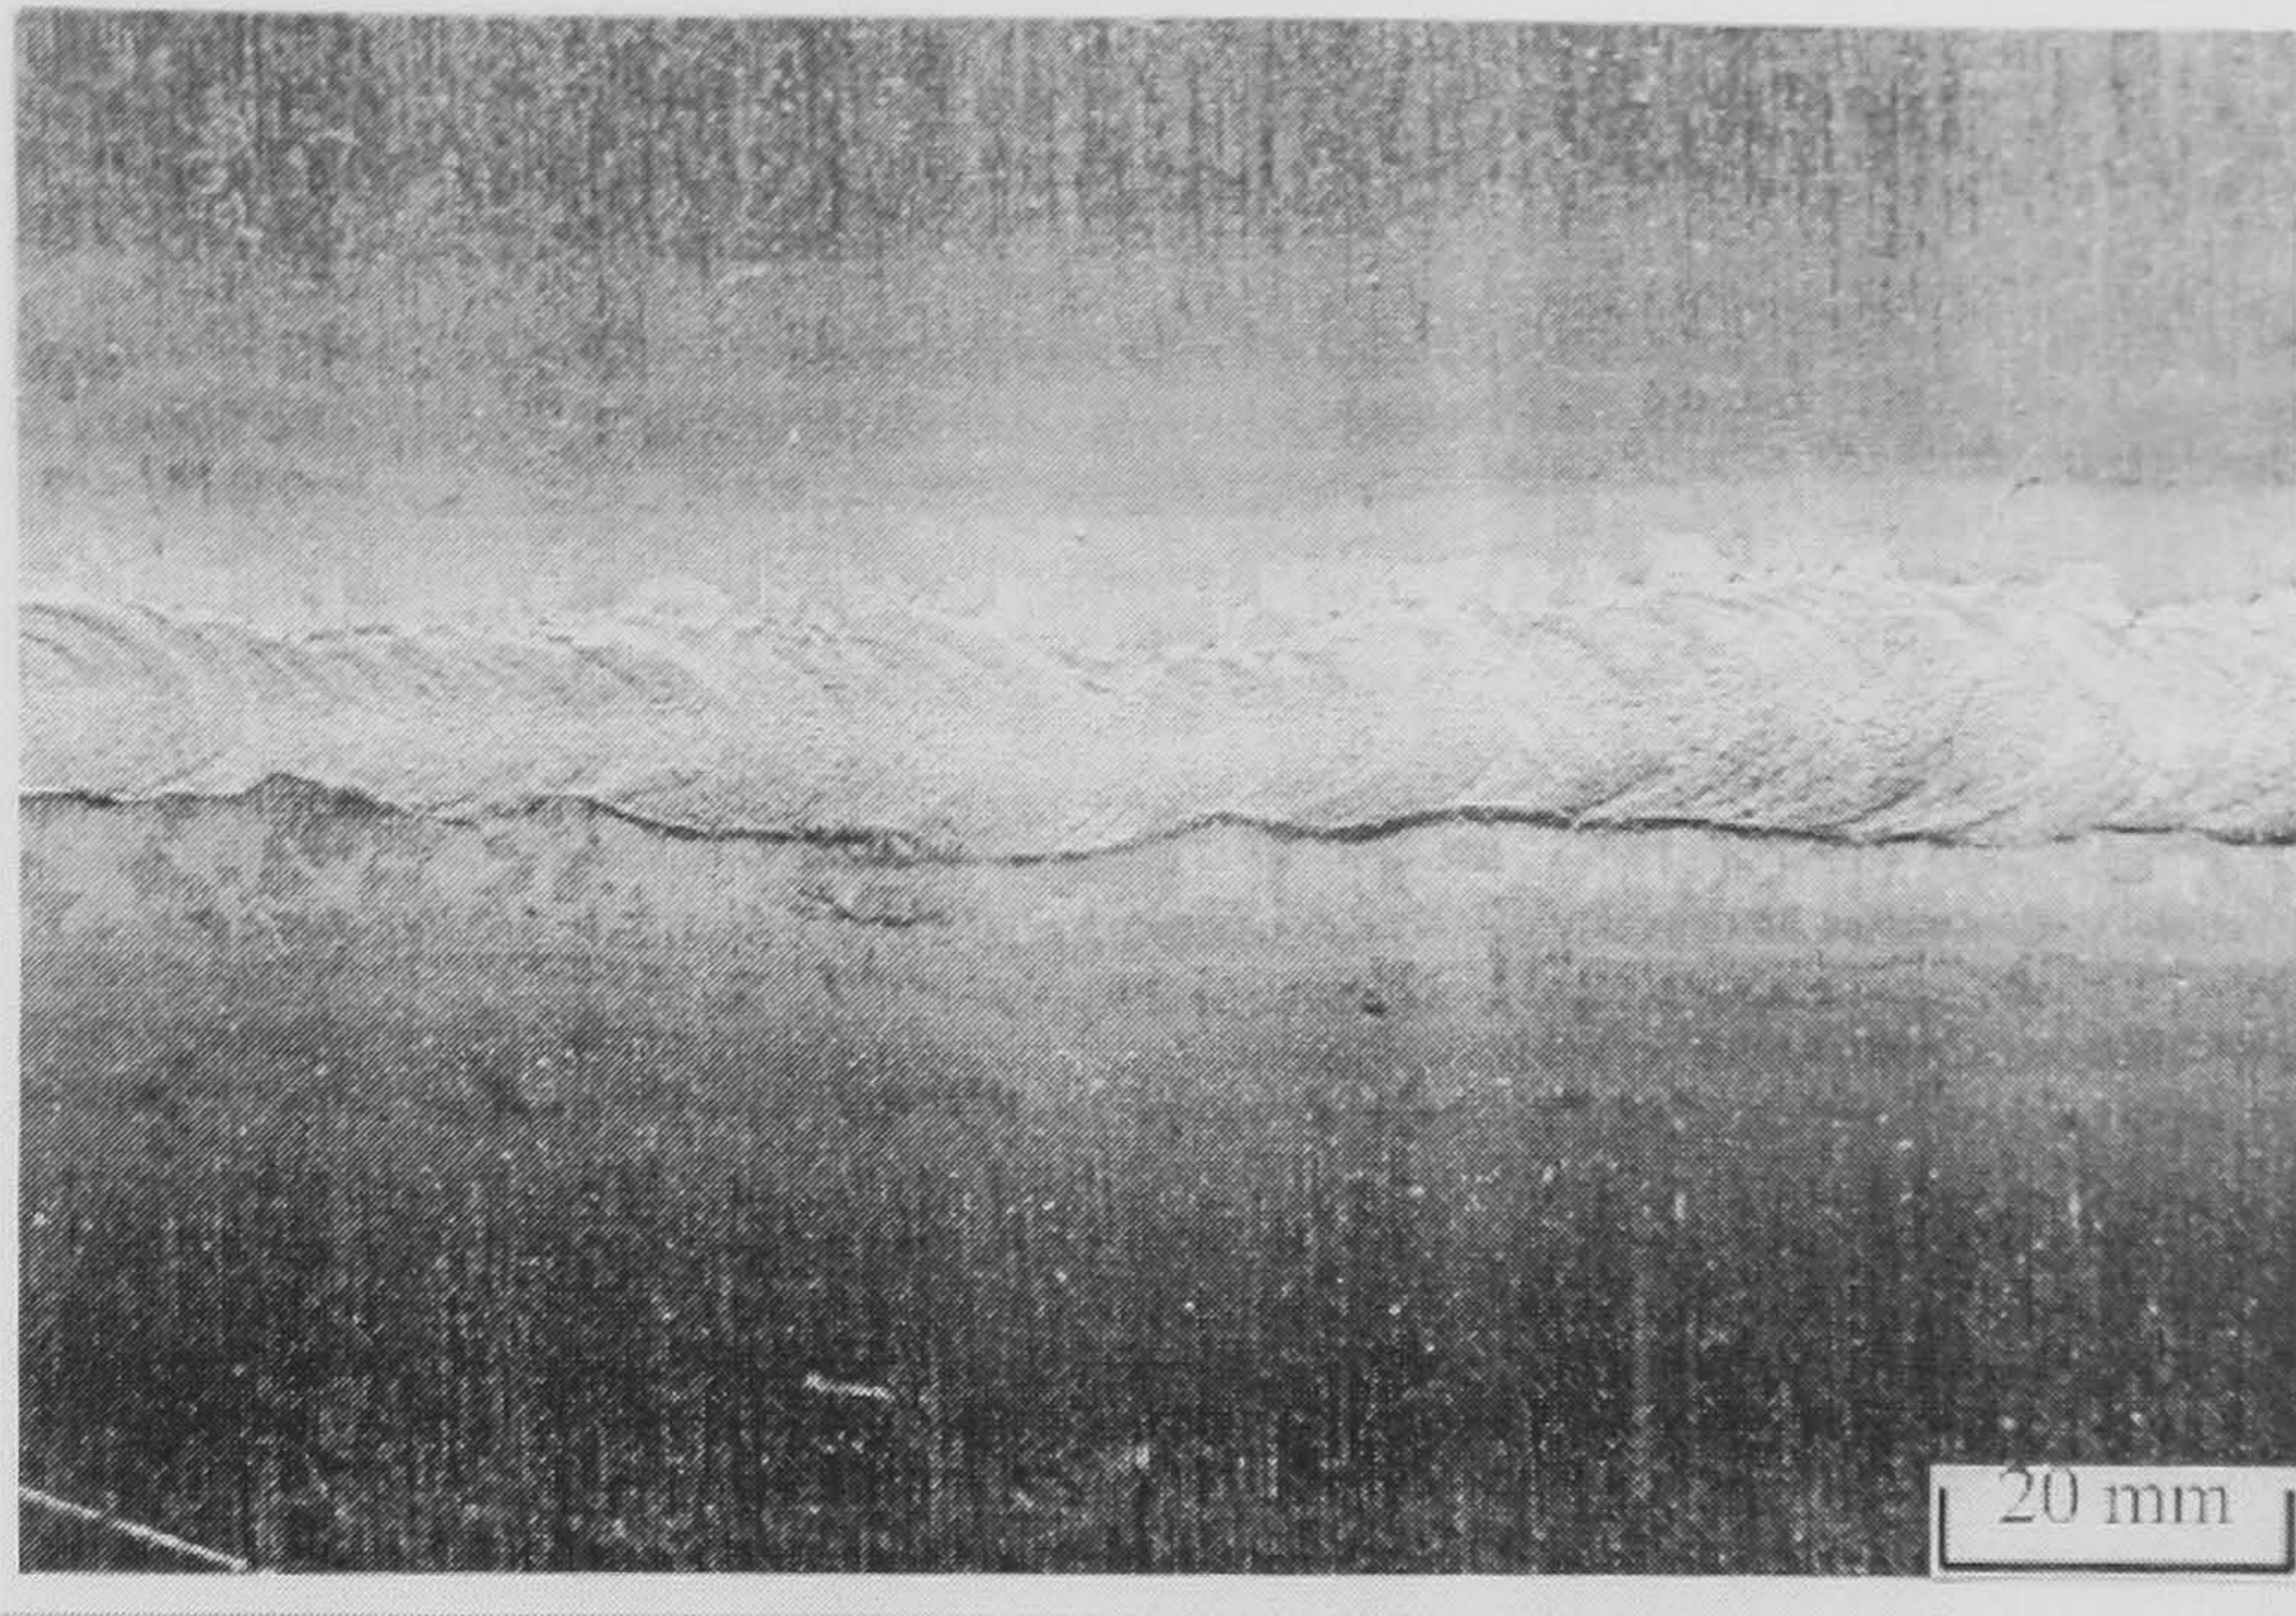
Weld seam appearance for CO₂ laser weld at a welding velocity of 7 mm/s
